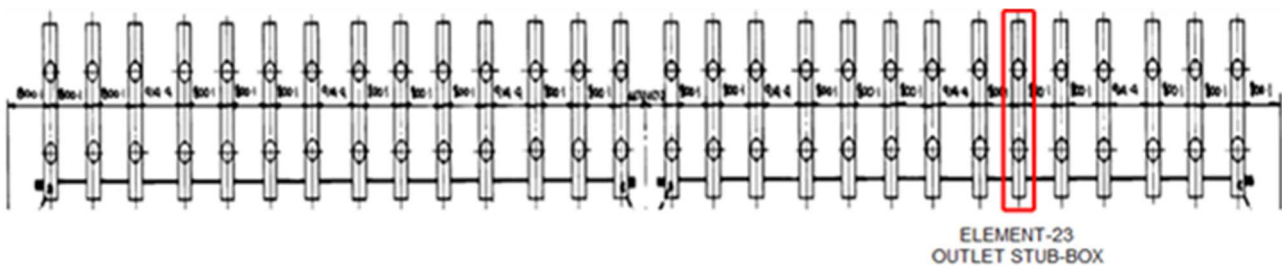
Thermocouples installed on the tubes just before the outlet stub-box of element 23 (Courtesy of Eskom).
